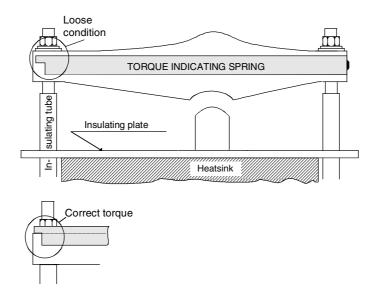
Aluminium spring with welded indicating spring
